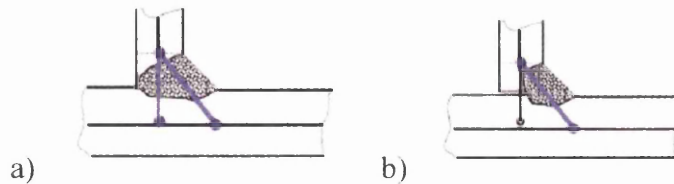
a) Full Penetration Weld, b) Partial Penetration Weld
